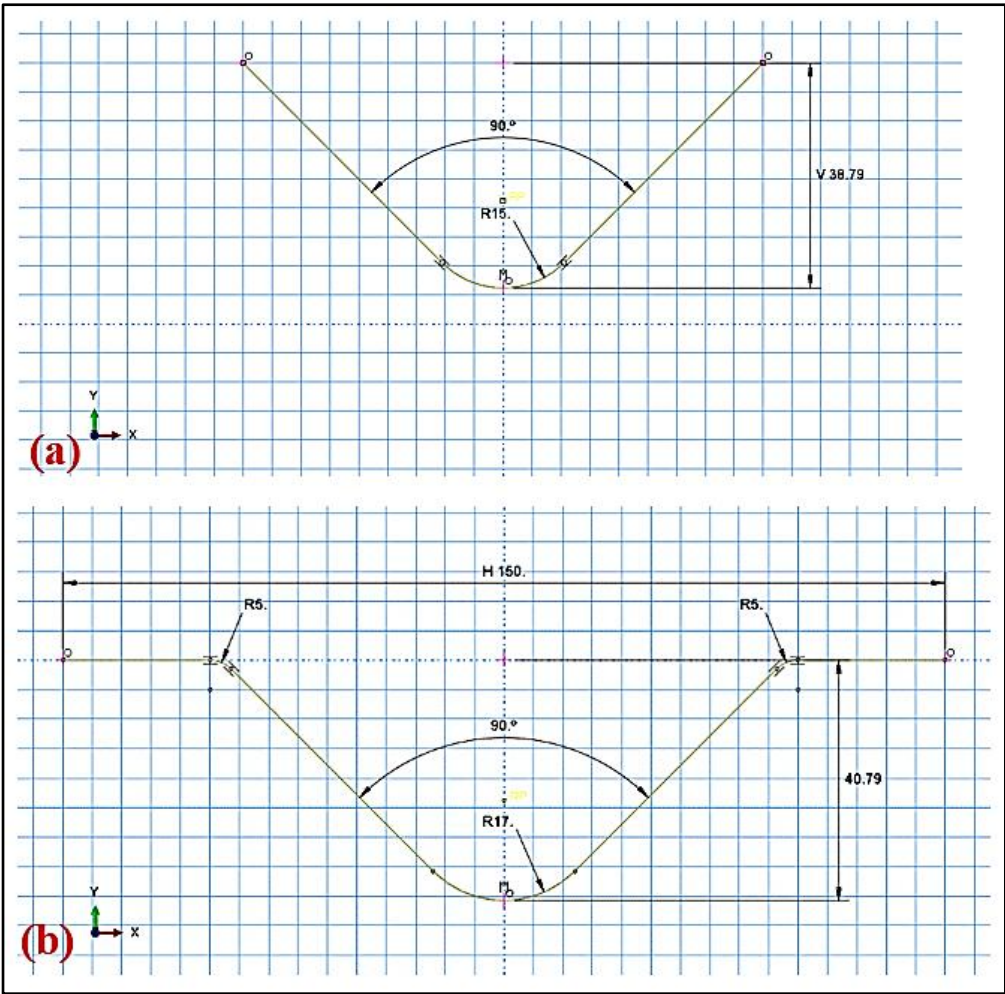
CAD model of (a) Punch and (b) Die for blank of 2-ply clad sheet
